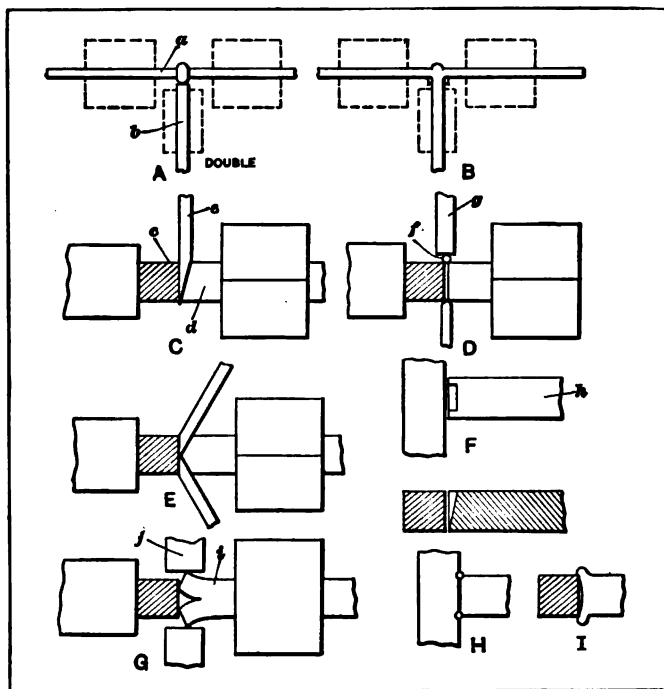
Method of making a Tee-weld on Thin Stock, also Method of making Tee-welds without reducing Original Dimensions of Parts being welded
